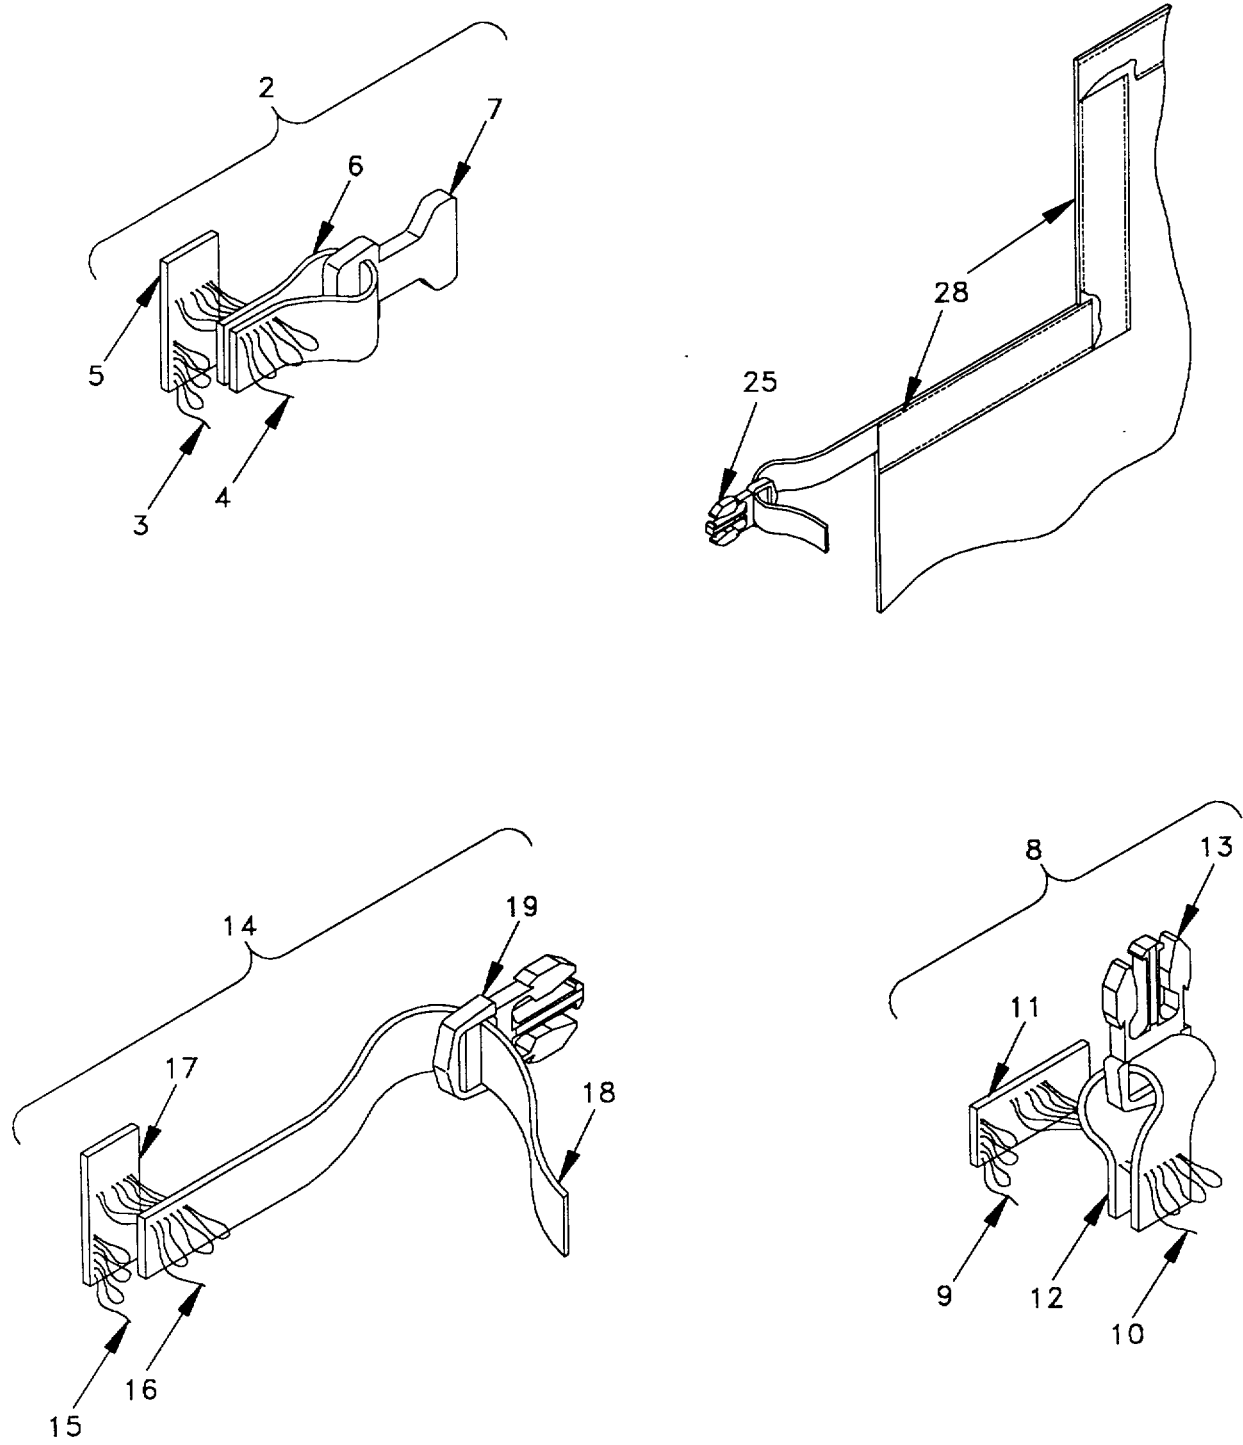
Window Wall Assembly (Sheet 2 of 2)
